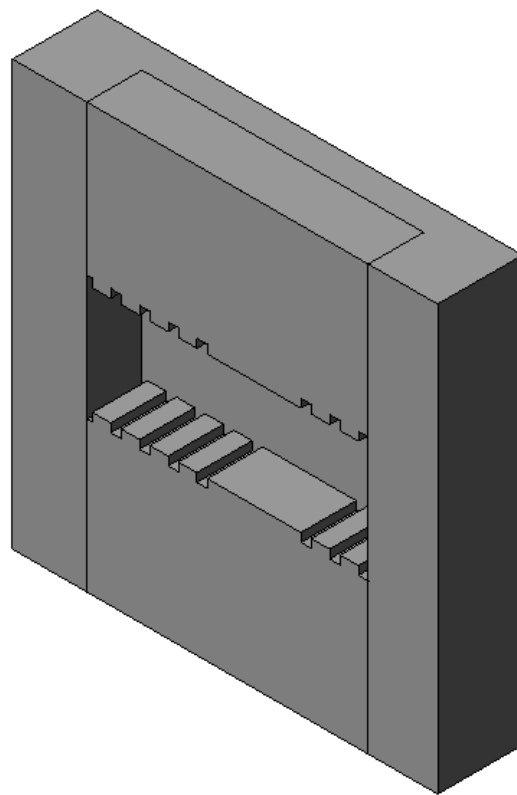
Solid Works technical drawing of the Teflon Mould.
